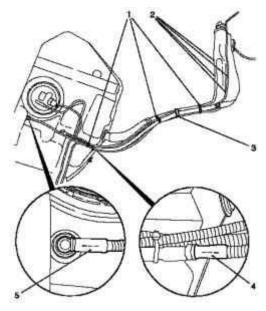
Removing the tube from the water separator fuel filler: 1 - cable ties 2 - filler tube, 3 - line of ventilation of the fuel tank, 4, 5 - hoses Ventilation motor
